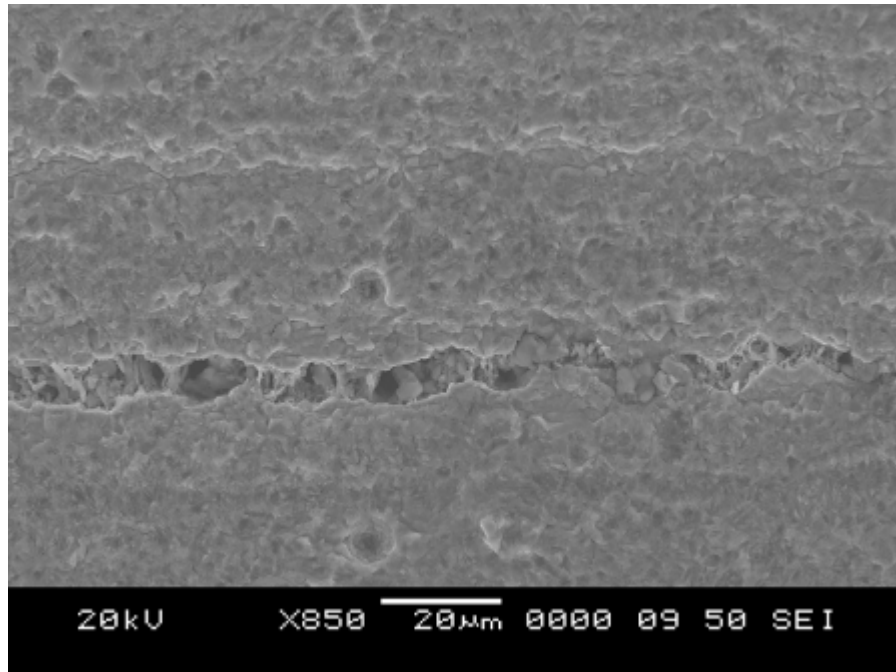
Tooth 28 root, gear half, coast side cracking along tool marks.
